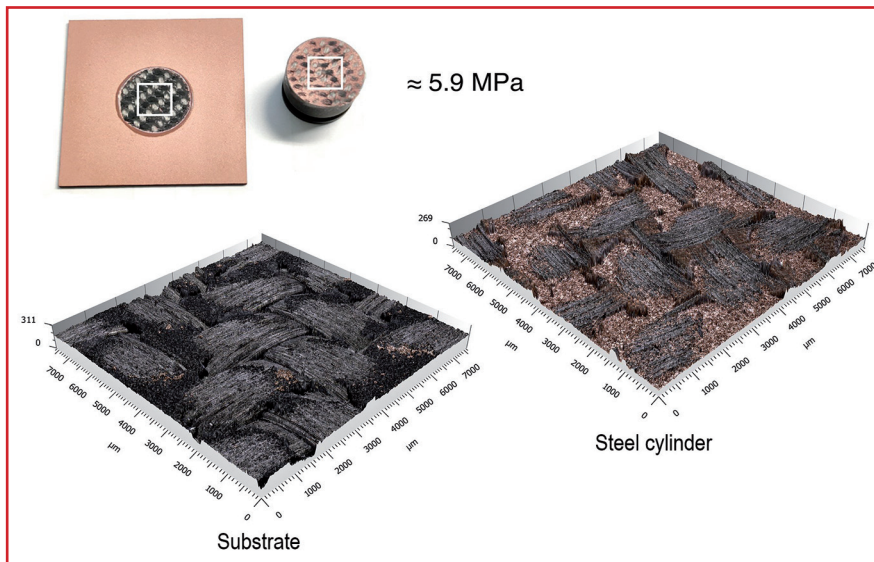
Above: view of sample and dolly after adhesive test (Cu3), below: 3D fracture images by confocal microscope
